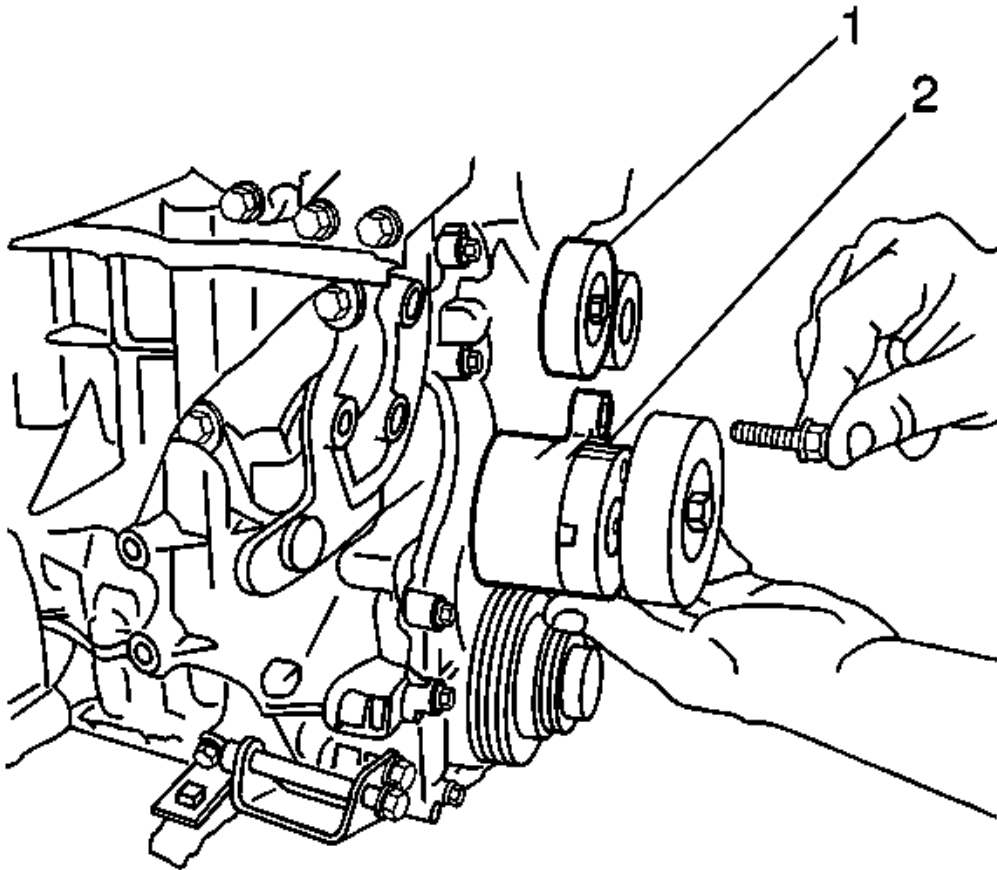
View Of Drive Belt Tensioner Bolts & Idler Pulley
